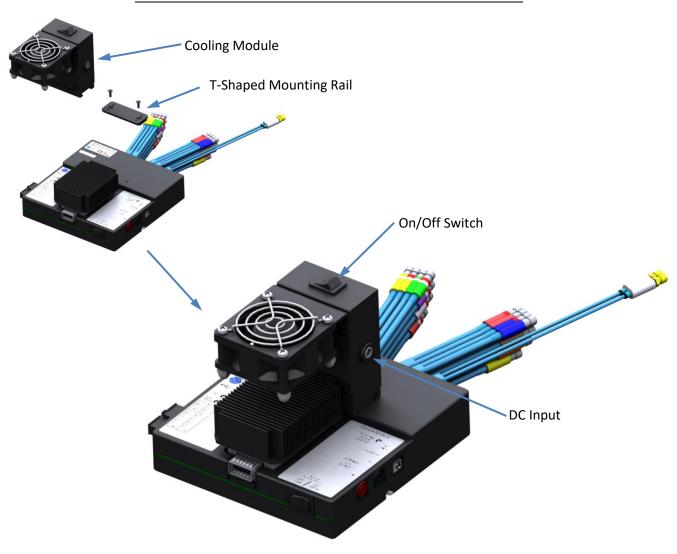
The QSFP-DD 1.6T MCB (Receptacle) Test Adapter with Cooling Module
